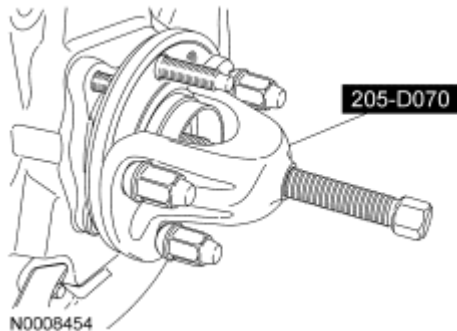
Pressing Halfshaft From Wheel Bearing & Hub
